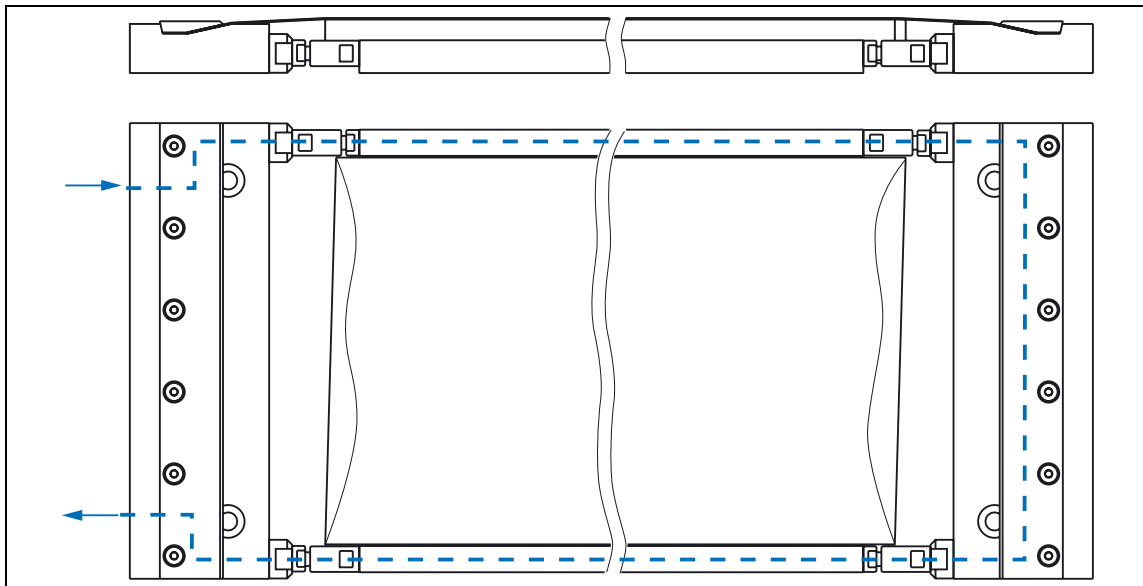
Secondary section cooling for 1FN3050...1FN3450-type motors with combi adapter and combi end piece (side and top view)
